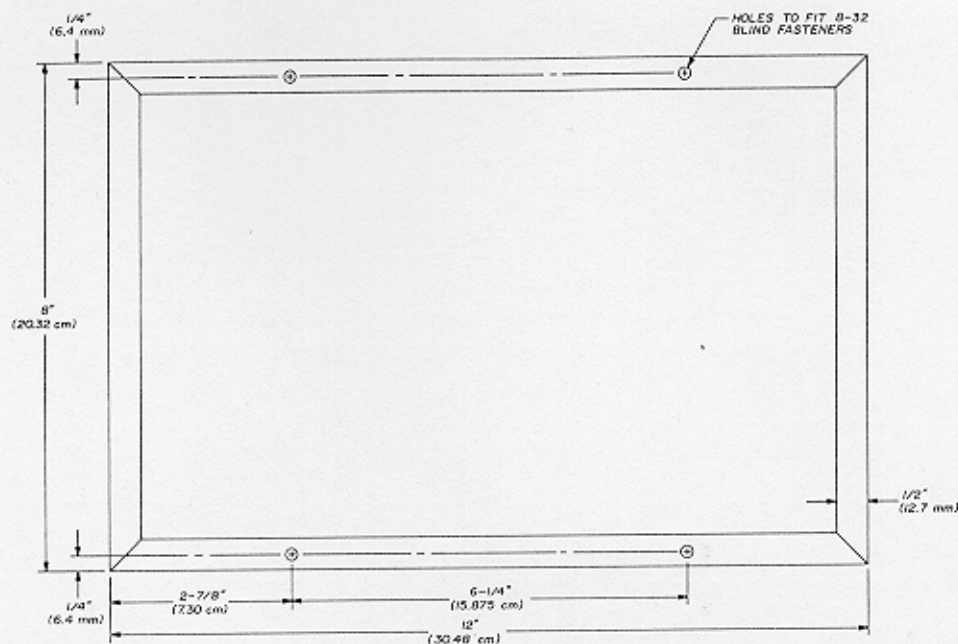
Top view of the upper chassis showing the top plate mounting holes. All holes are drilled to fit 8-32 (M4) blind fasteners.
